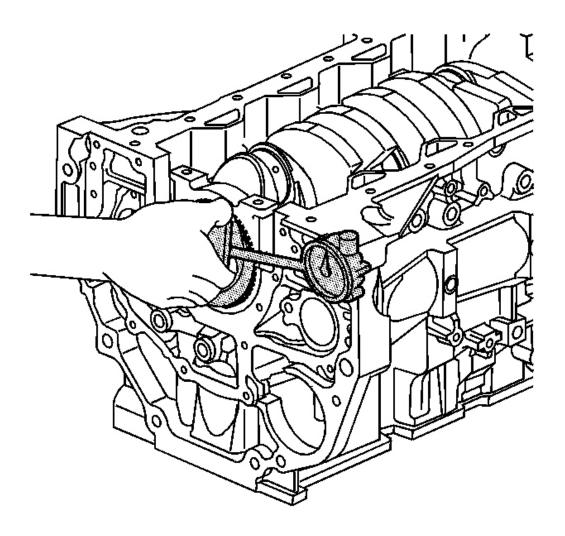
Measuring Engine Block Flange Runout Courtesy of GENERAL MOTORS CORP.
